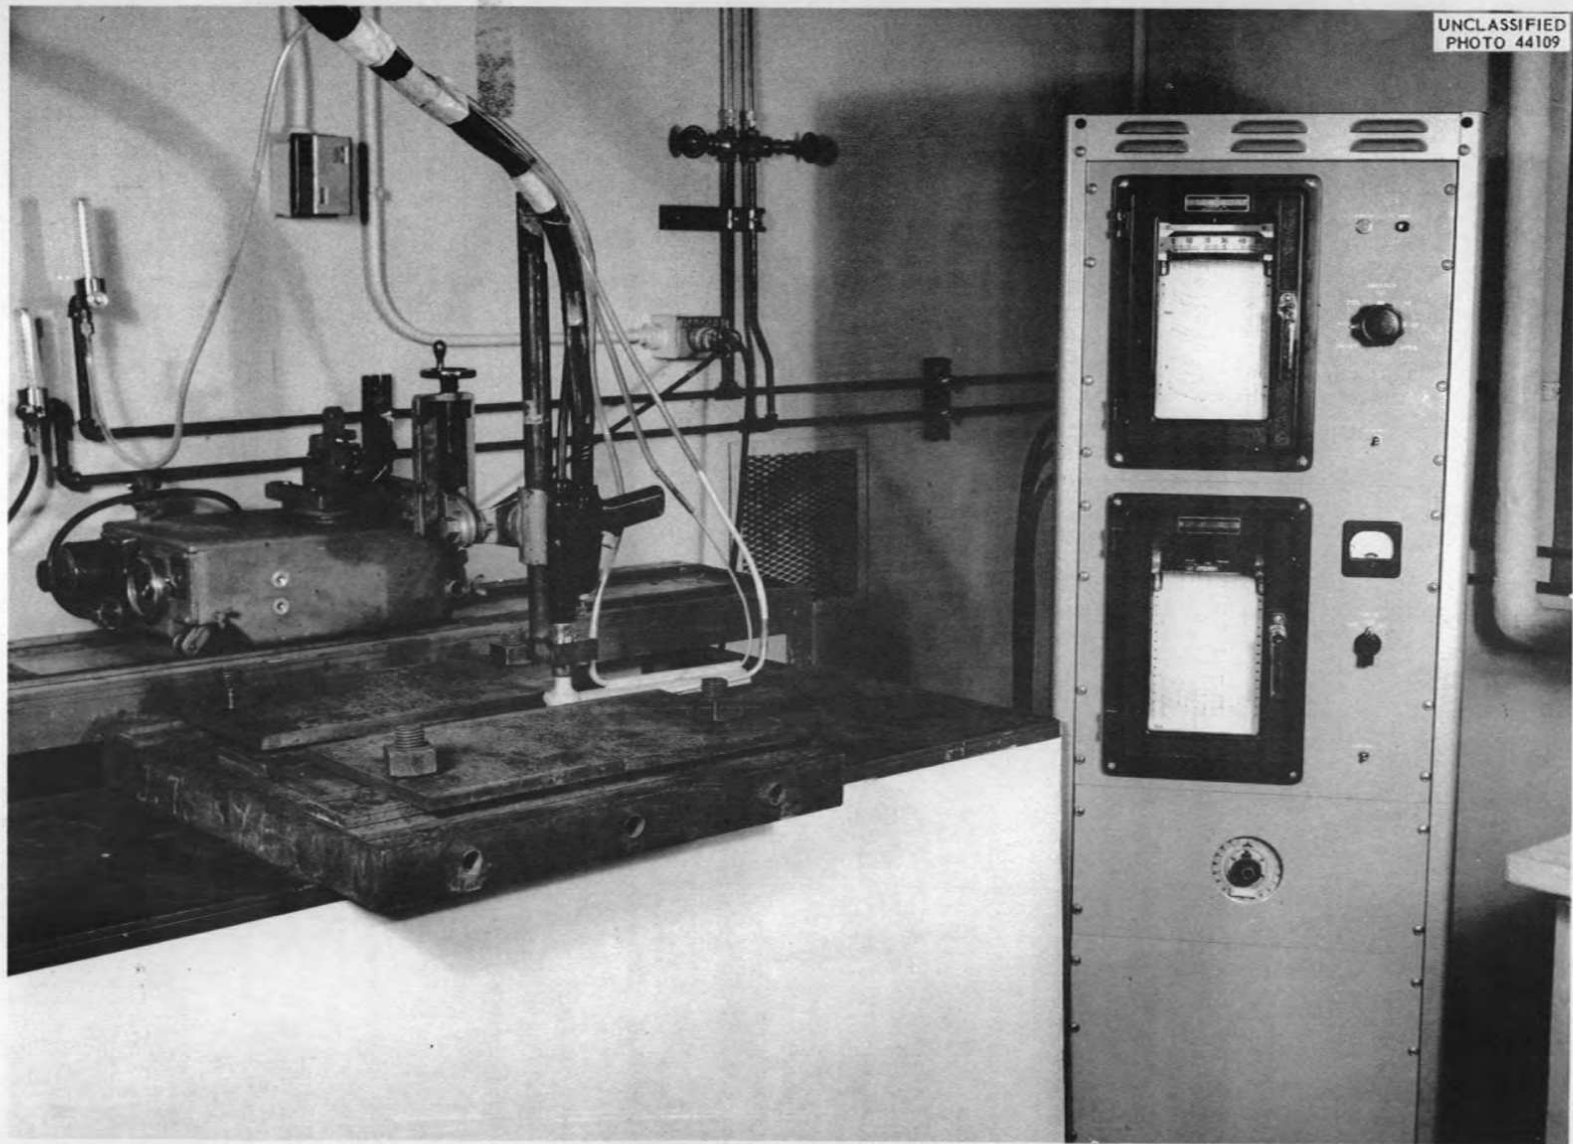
Equipment for Inert-Gas Shielded Metal-Arc Welding of Columbiu Plate. Welding gun, trailer shield, and movable train are at the left and the voltage and current recorders are at the right. [REDACTED] with caption)
